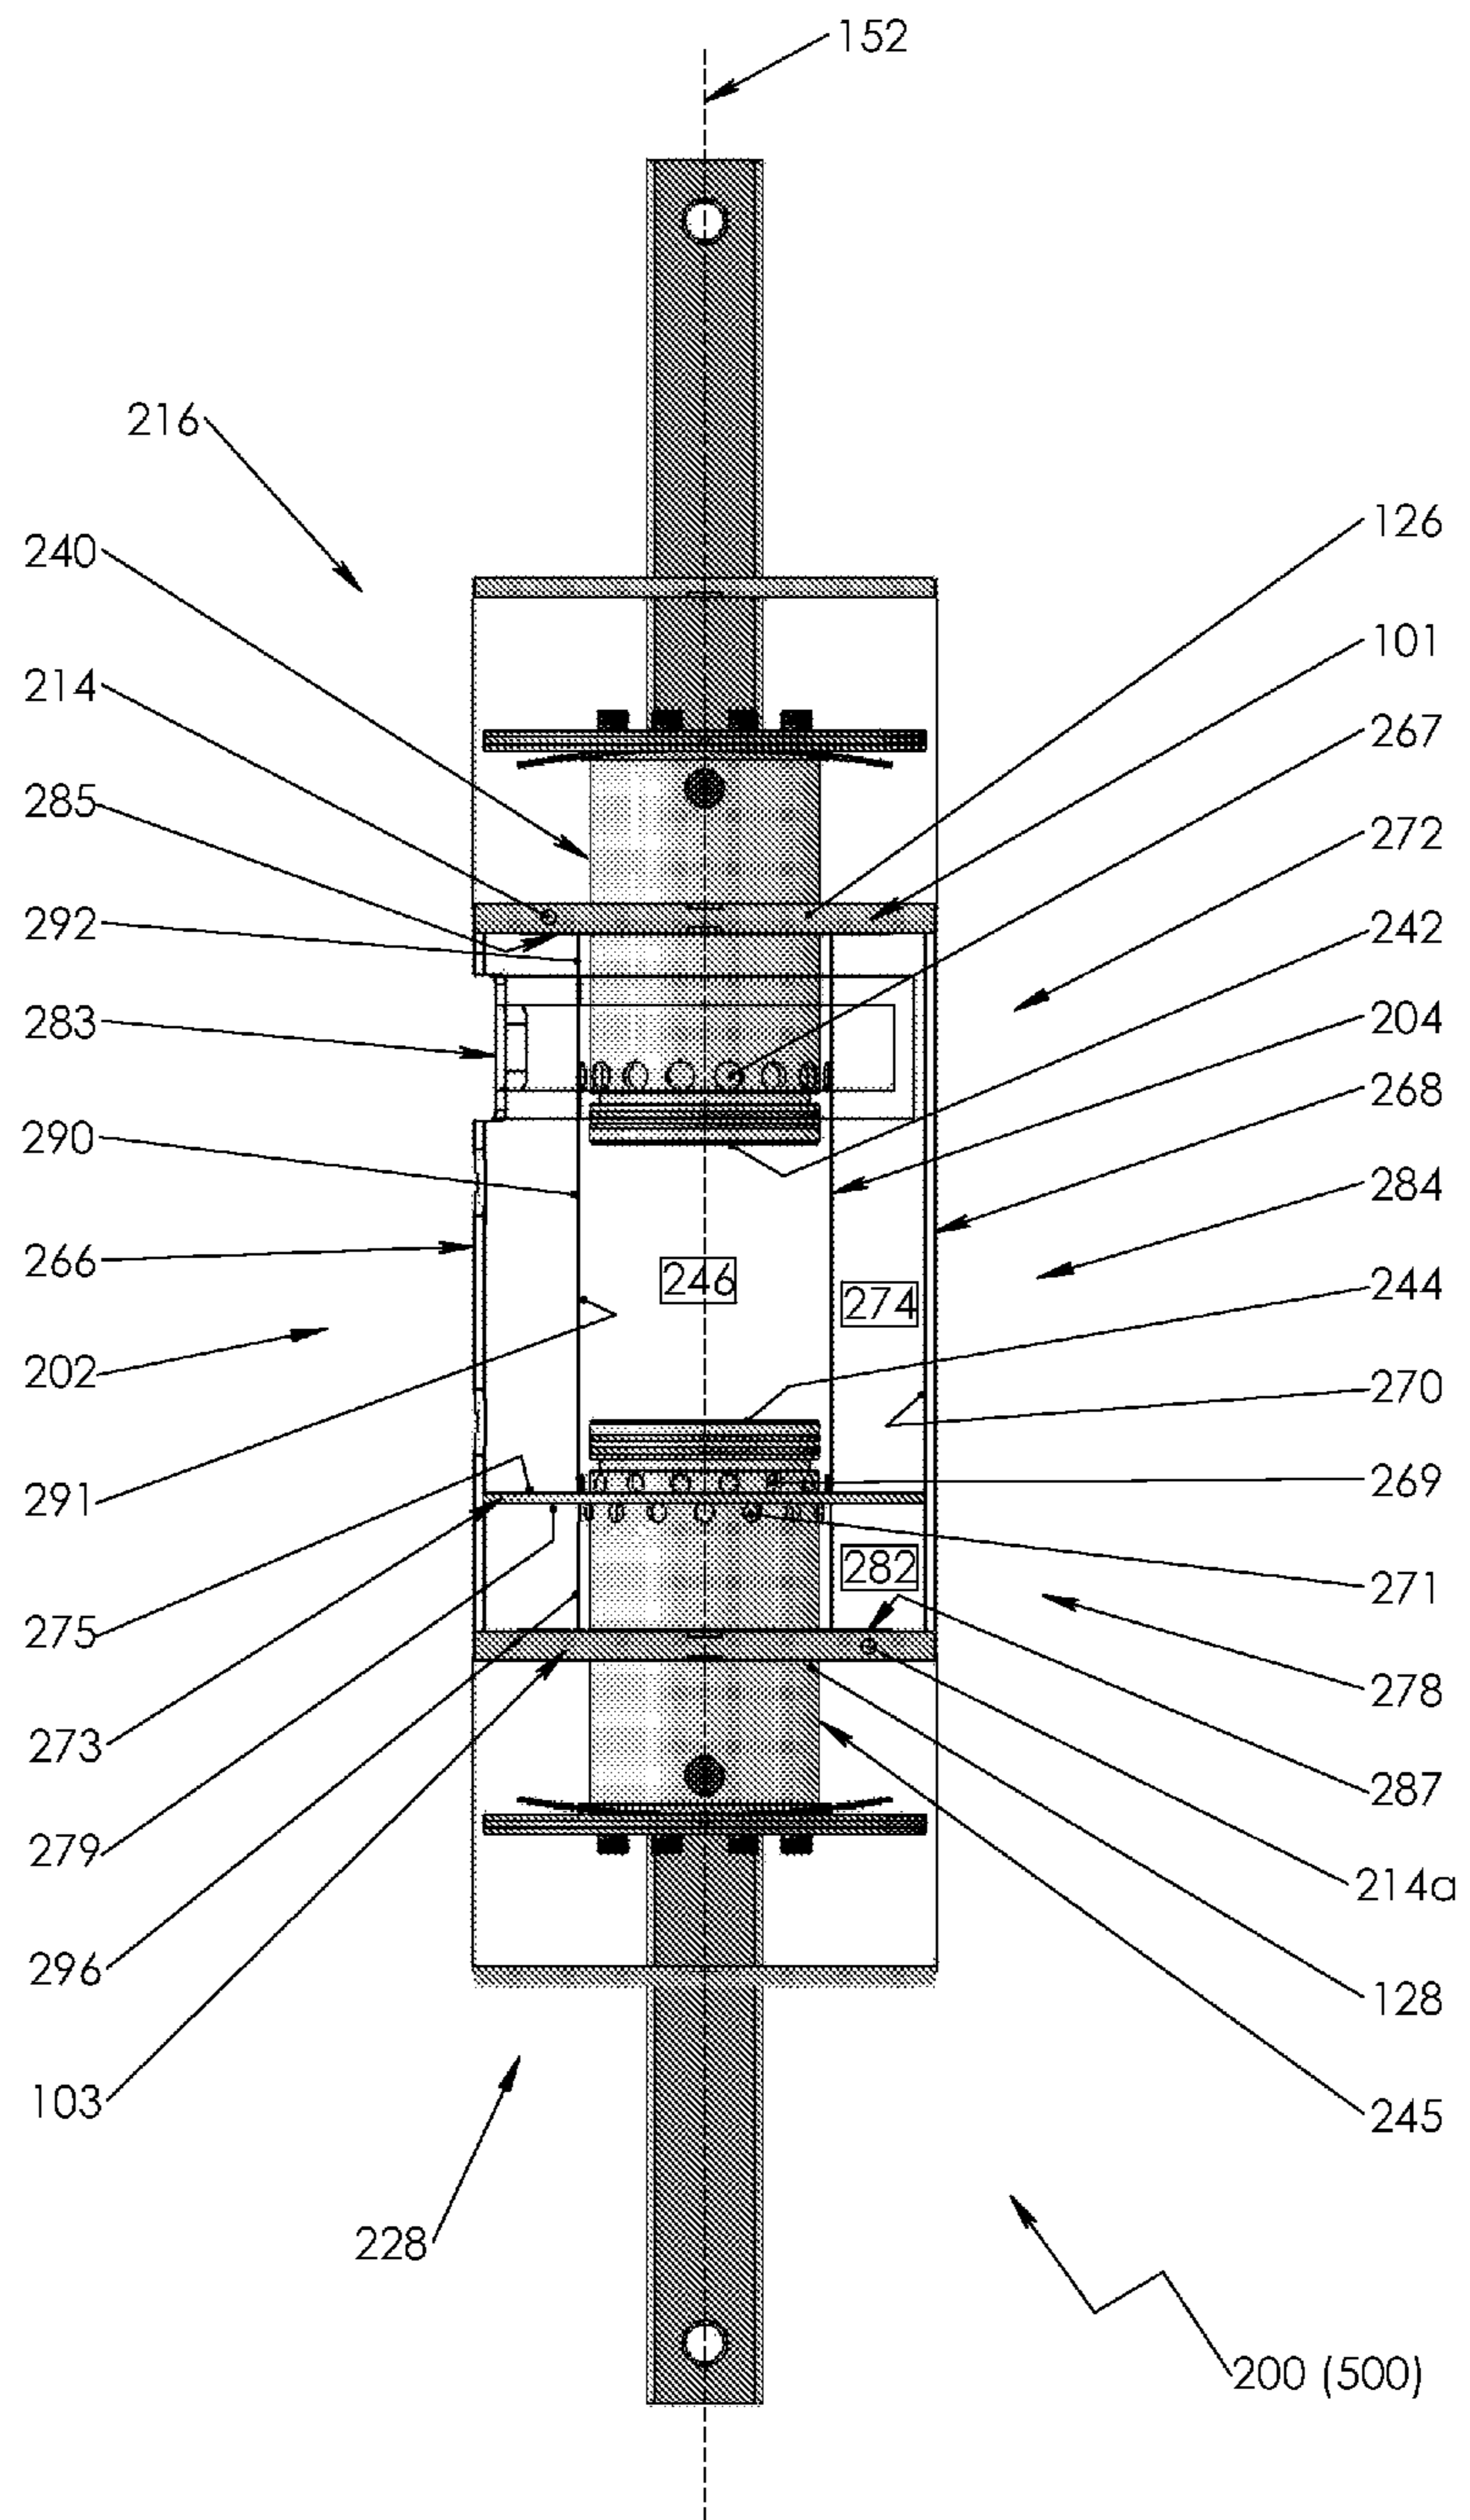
B. SIDE, CROSS-SECTIONAL VIEW OF COMBUSTION ASSEMBLY DURING ENGINE CYCLE
